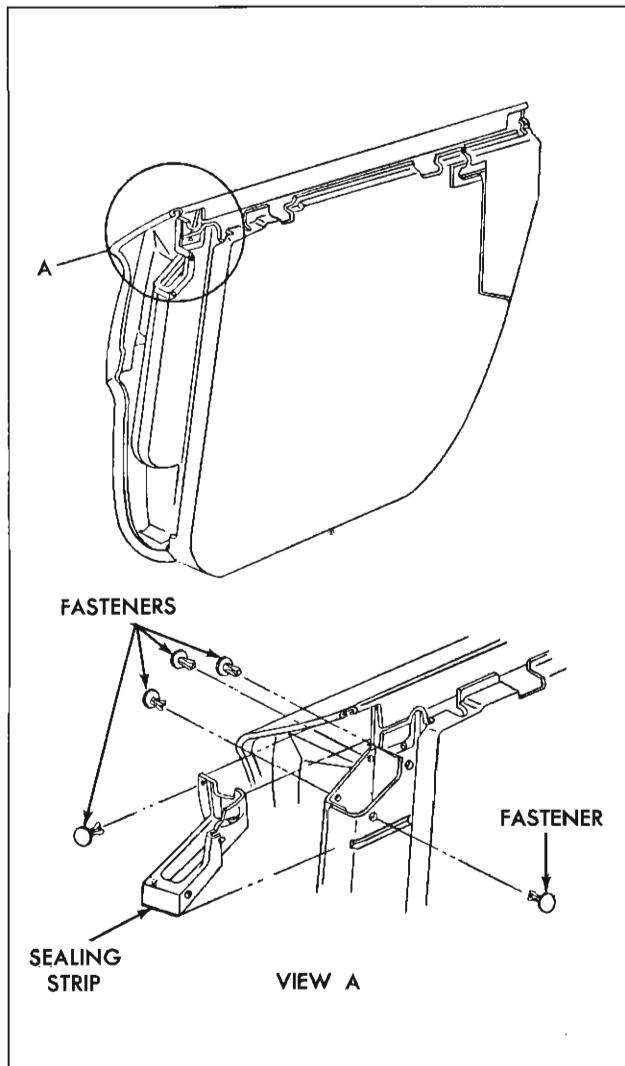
Rear Door Hinge Pillar Sealing Strip
